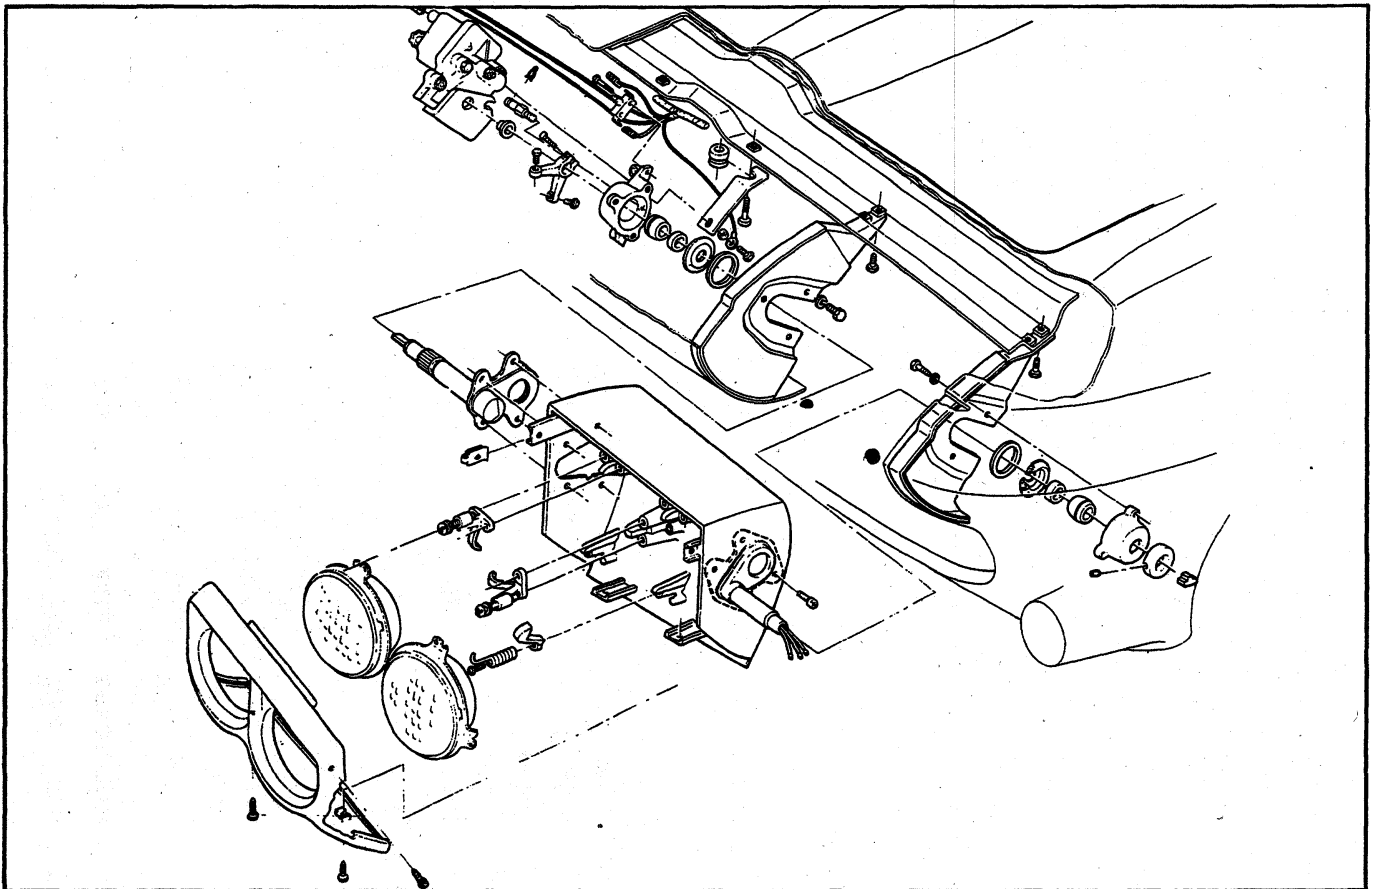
Headlamp Panel and Motor Details (Corvette)
